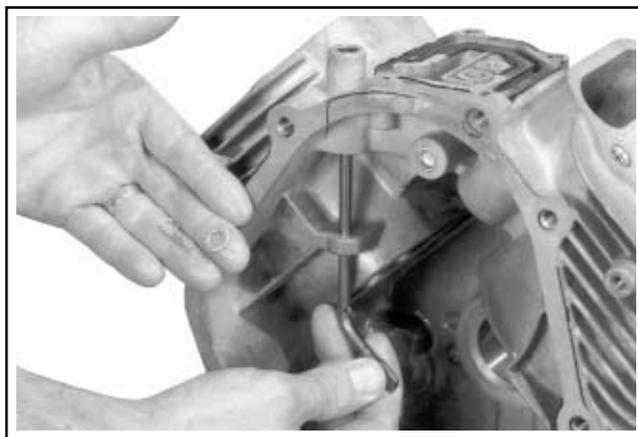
Installing 6 mm Governor Cross Shaft.
